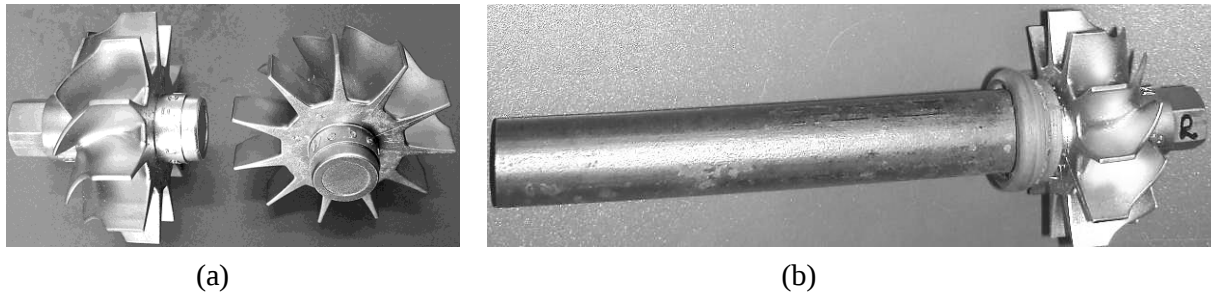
Wheels of PIM-alloy IN713C (a), welded turbocharger (b)
